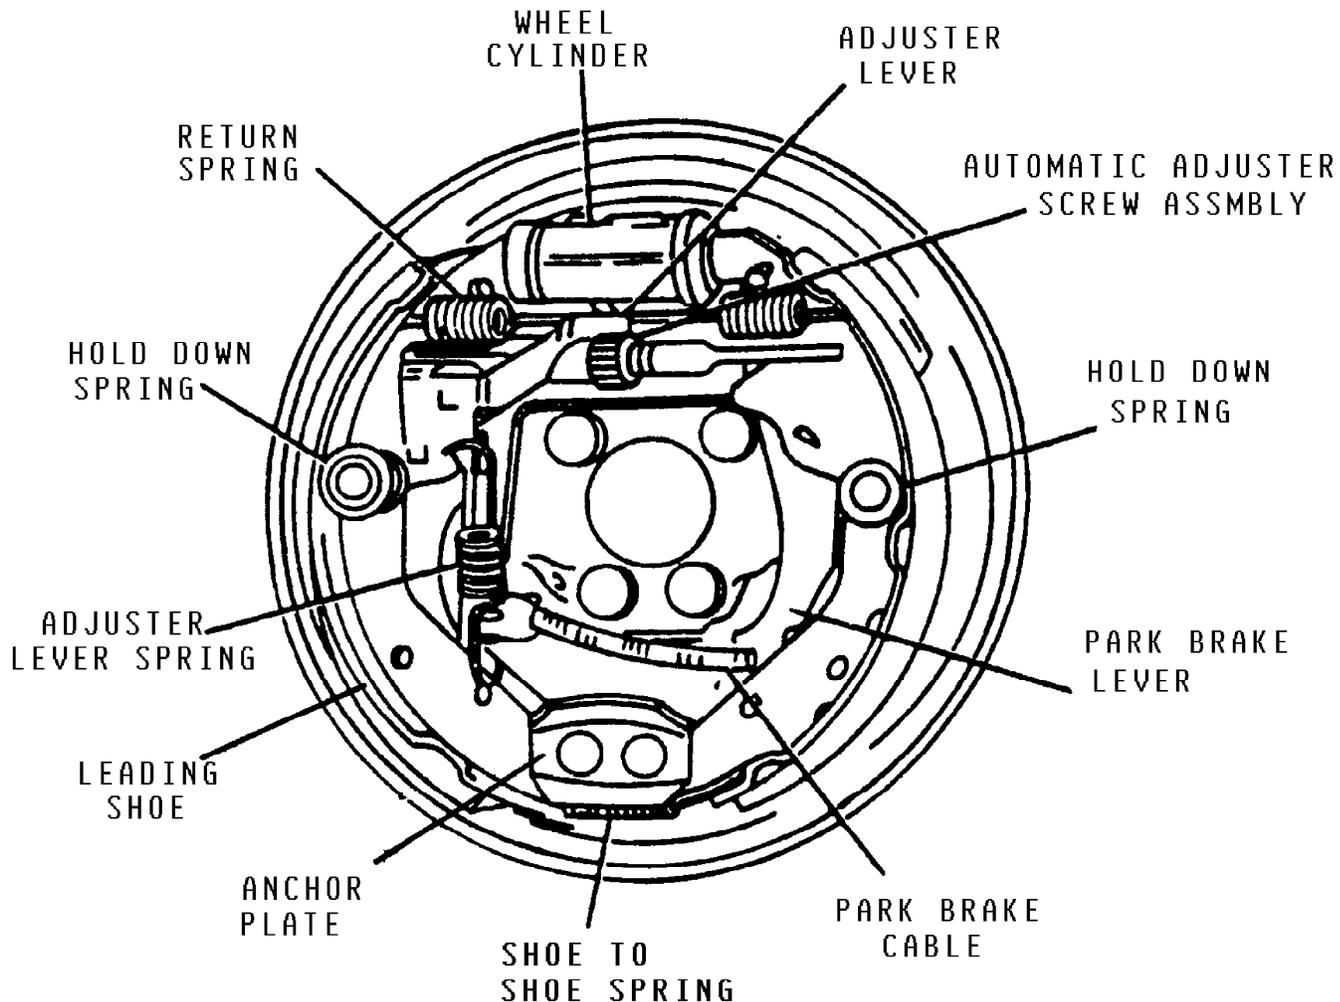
Kelsey Hayes Automatic Adjuster Brake Assembly
